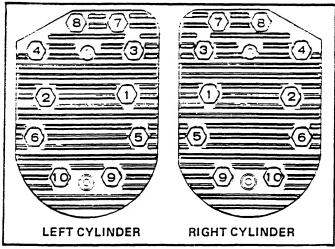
HEAD BOLT TIGHTENING SEQUENCE
